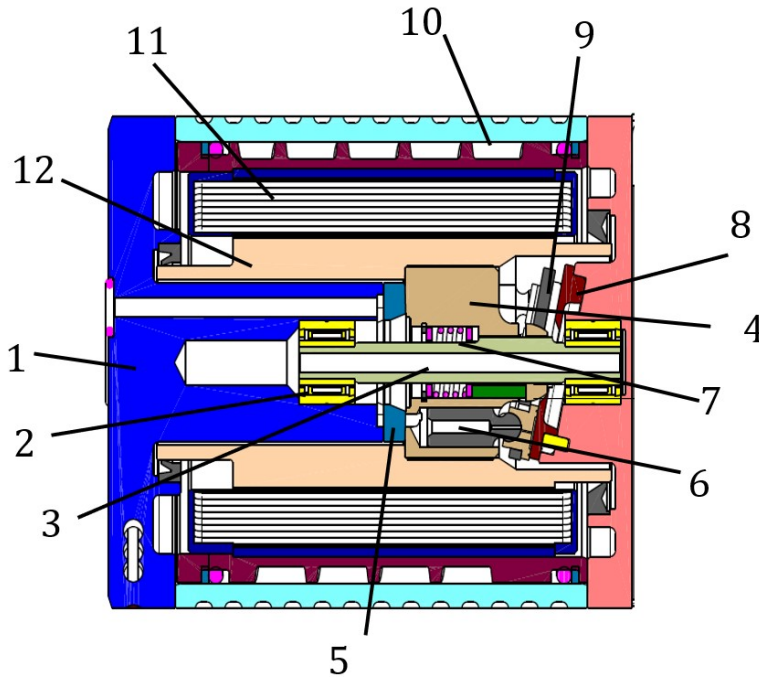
Main Hydraulic Group assembly; 1- MGH's body; 2- Bearing; 3- shaft; 4- Cylinder block; 5- valve plate; 6- piston; 7- spring; 8- swashplate; 9- retainer ring; 10- Oil jacket; 11- stator; 12- rotor
